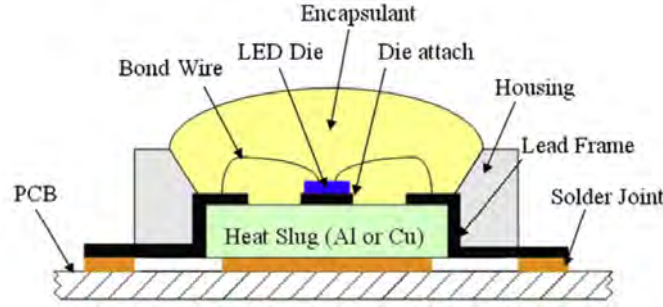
Cross-section of typical LED package structure where LED is assembled on PCB [4].
